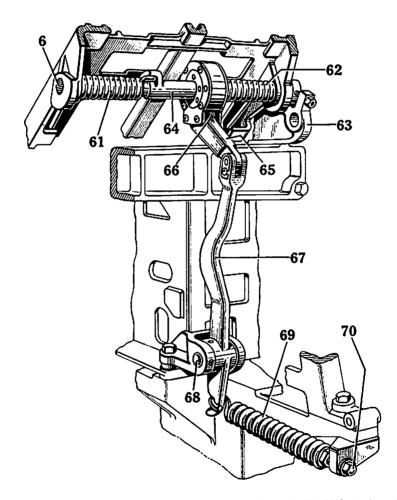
Magazine Frame Counterbalance Mechanism (C4, F4, G4, H4). Springs 61 and 62 counterbalance the front end of the magazine frame and assist in raising and lowering the frame with respect to the escapement rods or keyrods. Spring 69 counterbalances the frame while it is moving forward or backward on the two supporting brackets 63.
